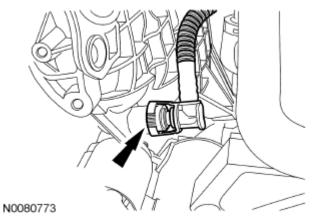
Locating Crankcase Vent Oil Separator Tube Tab Courtesy of FORD MOTOR CO.
